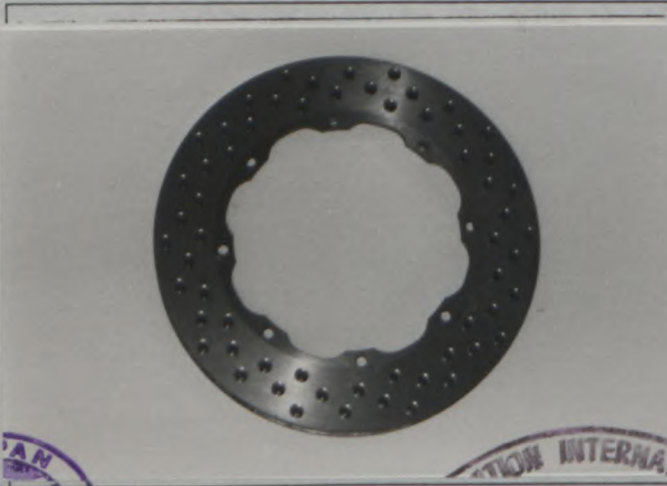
FRONT AND/OR REAR BRAKE DISC
